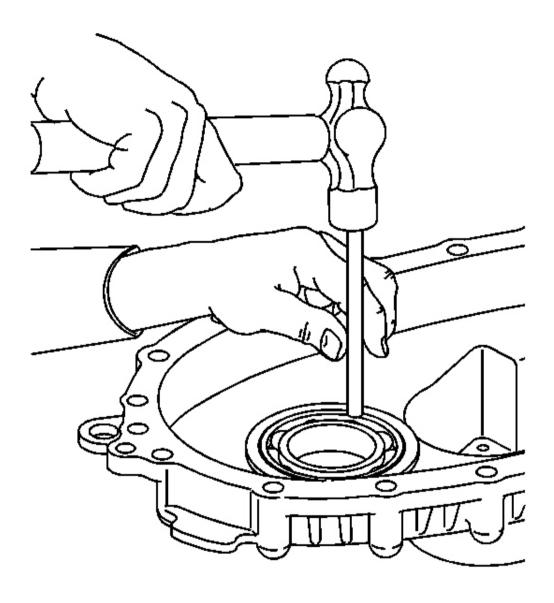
Installing Front Bearing For Front Output Shaft Courtesy of GENERAL MOTORS CORP.
